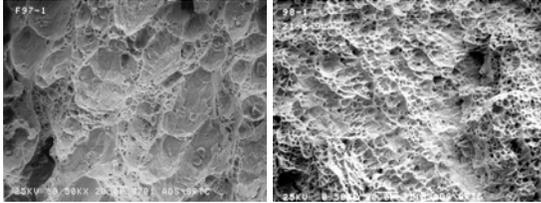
Fracture Appearance in Unexposed Type 21-6-9 Stainless Steel: (a) Base Metal and (b) Weldment. Crack propagation was from left to right.
